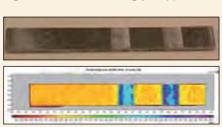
Non destructive techniques, investigation with Meandering Winding Magnetometer®.
